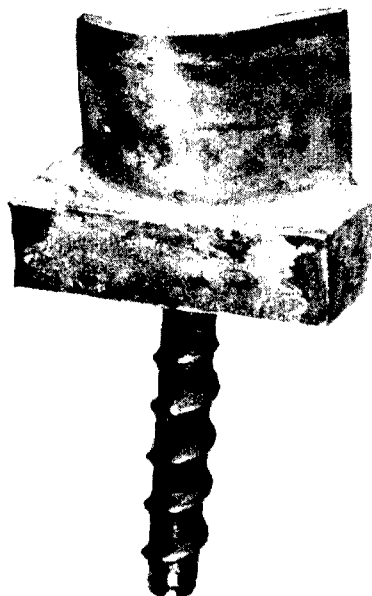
Fluid-Cooled Blade Containing Water-Welded Cap and Plug.
